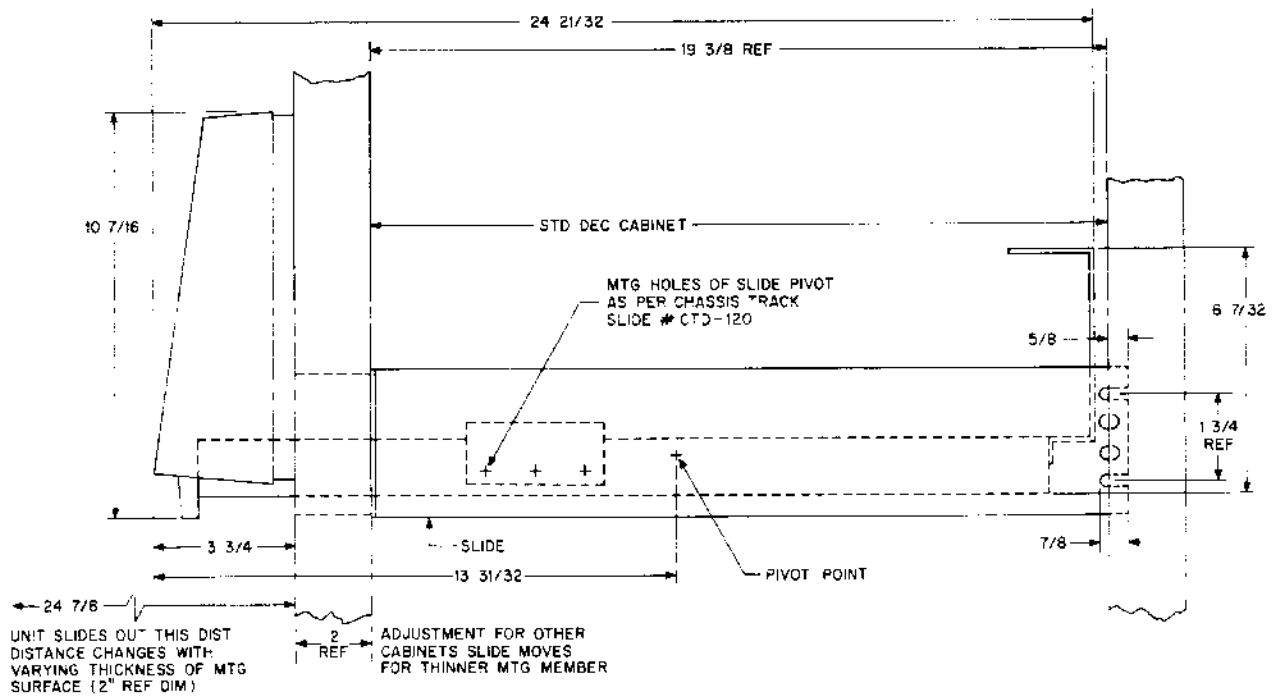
Dimensions, PDP-8/S Mounted in Standard DEC Rack
